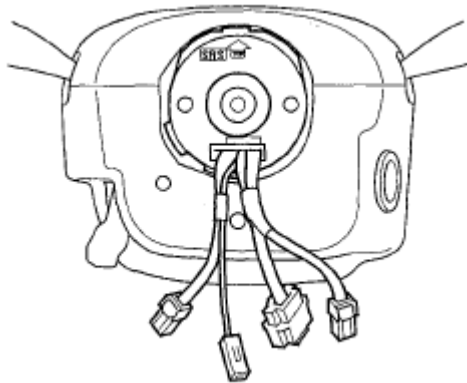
Identifying Arrow Mark On Cable Reel Label Points
